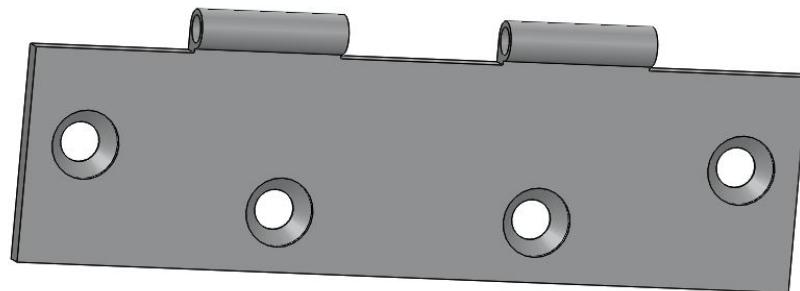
Ferrarer, Auston: Hinge Right Side
